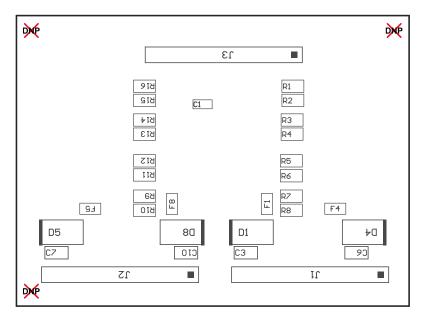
TPS2388EVM-016 (Daughterboard) Bottom Side Assembly
